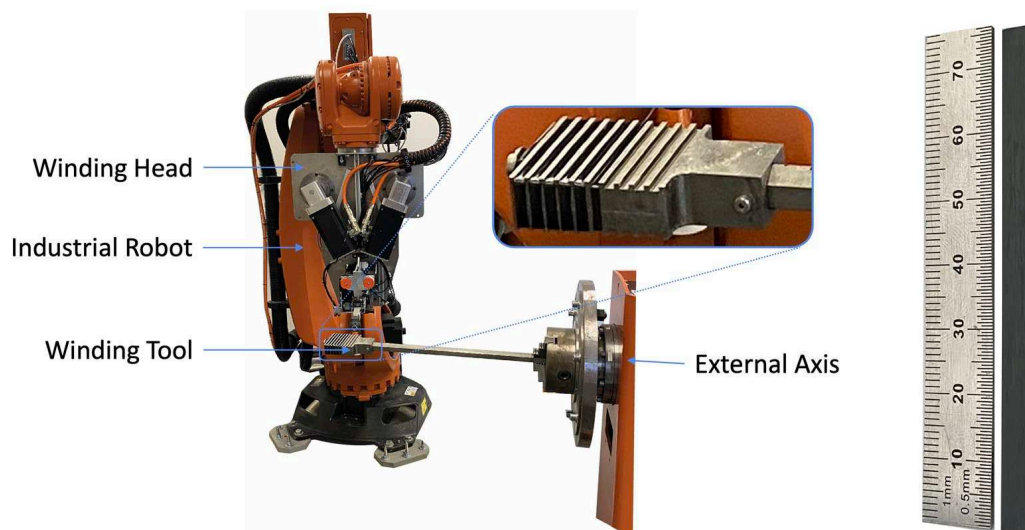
Robot-based filament-winding cell with a detailed view at the tool for manufacturing the CFRP specimen(left) and the final CRFP reinforcement structure (right)
